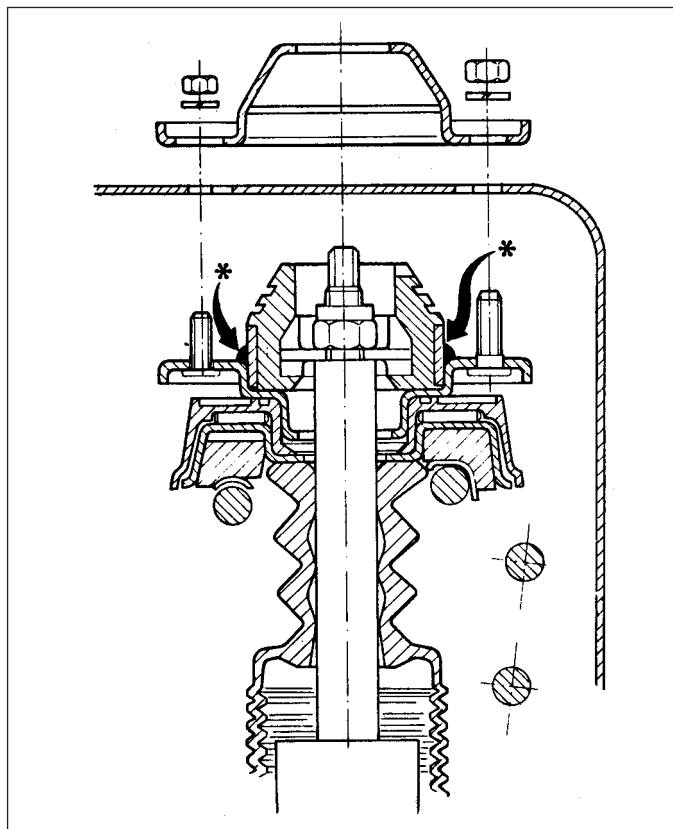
Waterproof bead applied to strut with top cover removed (Sec 3)
